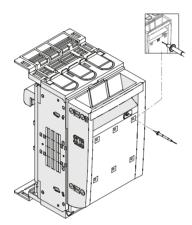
Knockout openings for voltage testing with a test probe, taking size 00 as an example
